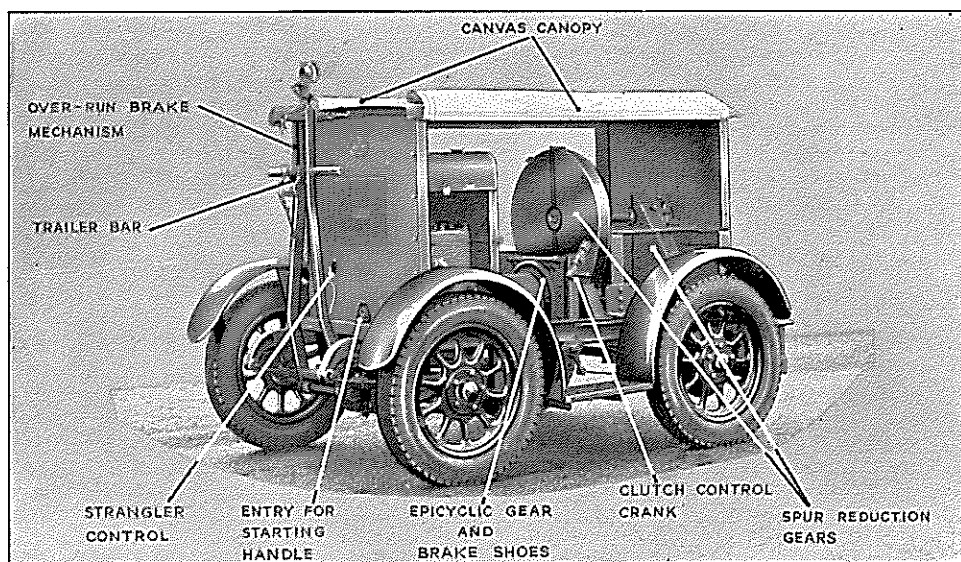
LACY-HULBERT WINCH—TRAILER TYPE (FRONT VIEW)
